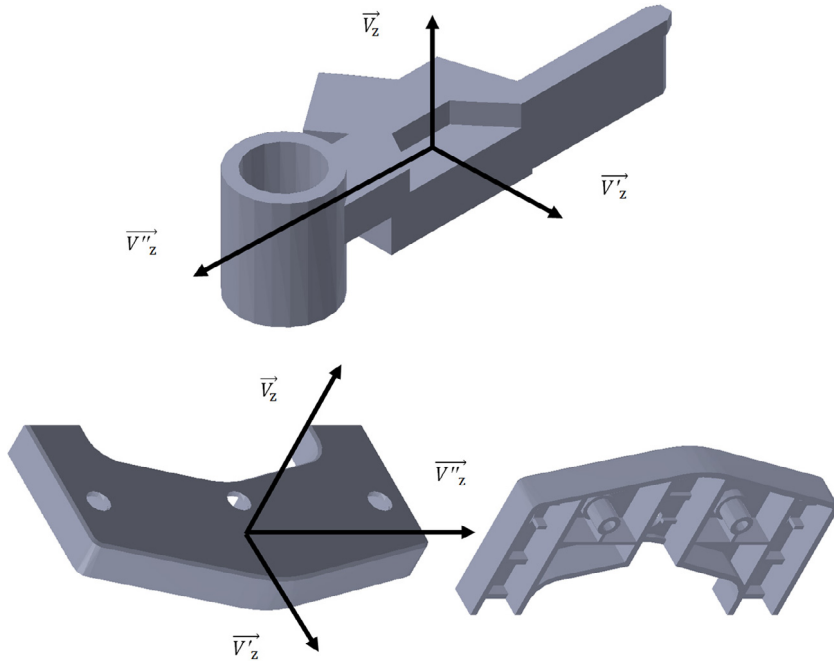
Case A and B, demoldable parts by means of upper and lower cavities.
